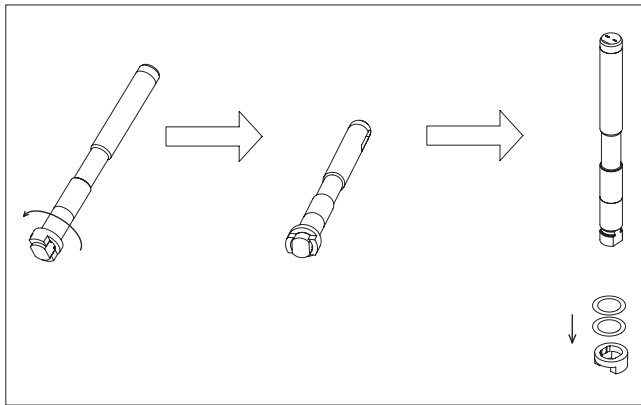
Detaching the thrust ring in sizes 1" and 1.5"
